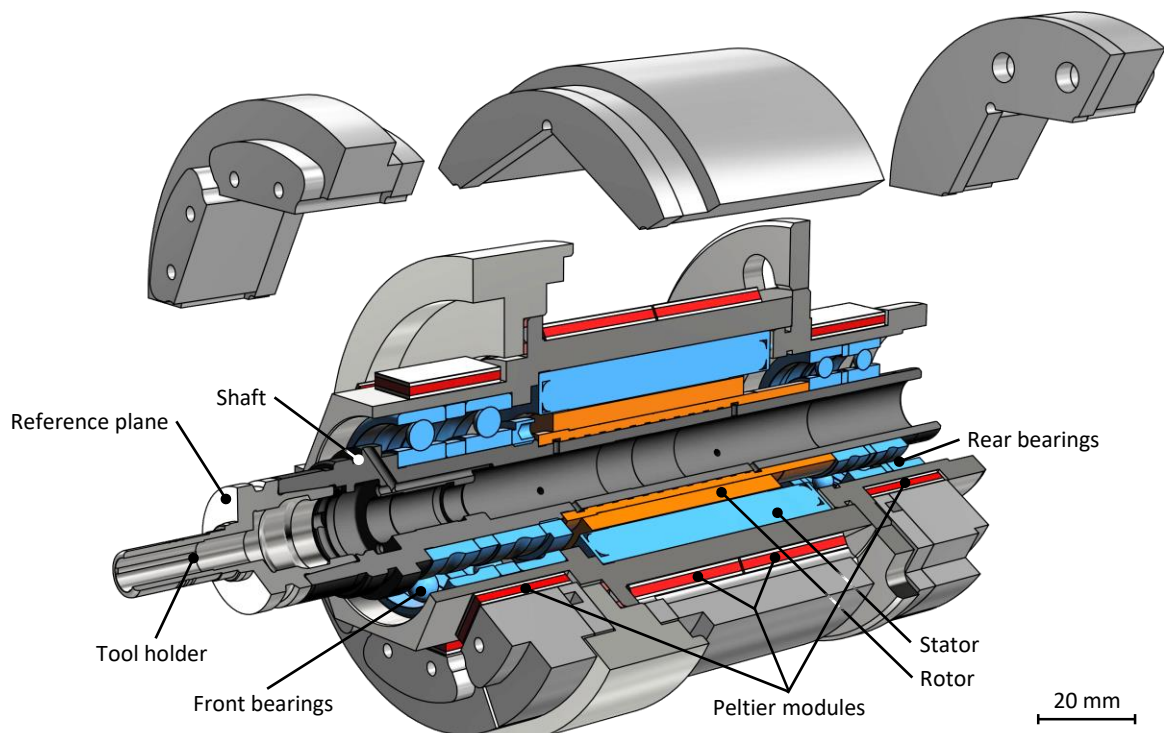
Model of a thermoelectric tempered motorized milling spindle
